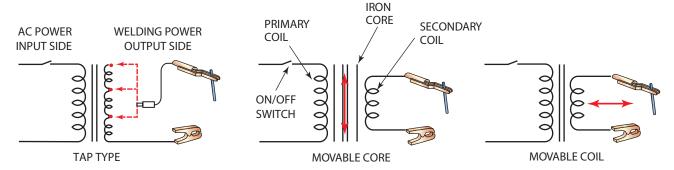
Major types of adjustable welding transformers.
